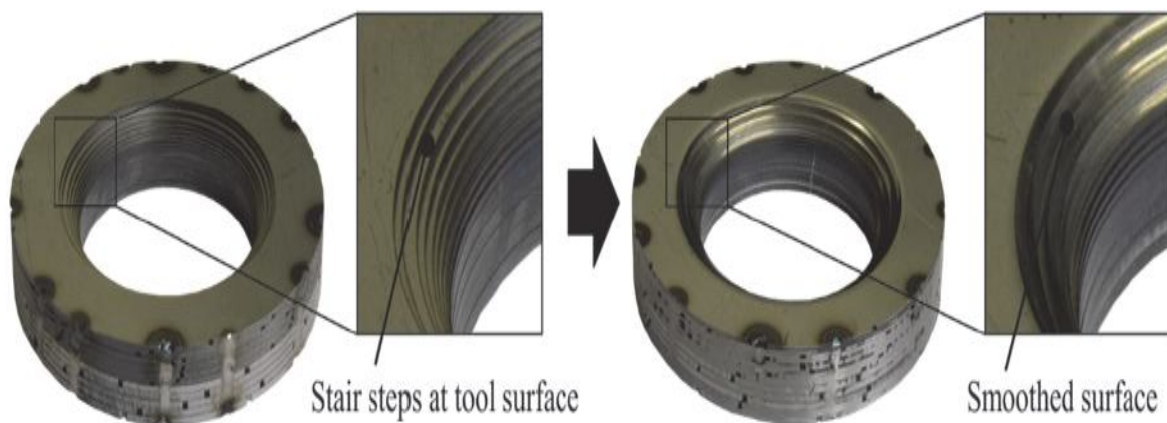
Layer manufactured deep drawing tools with and without post treatment
